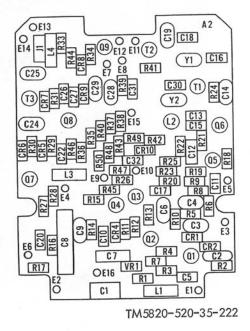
Printed circuit board 1A6A2, parts location diagram.
